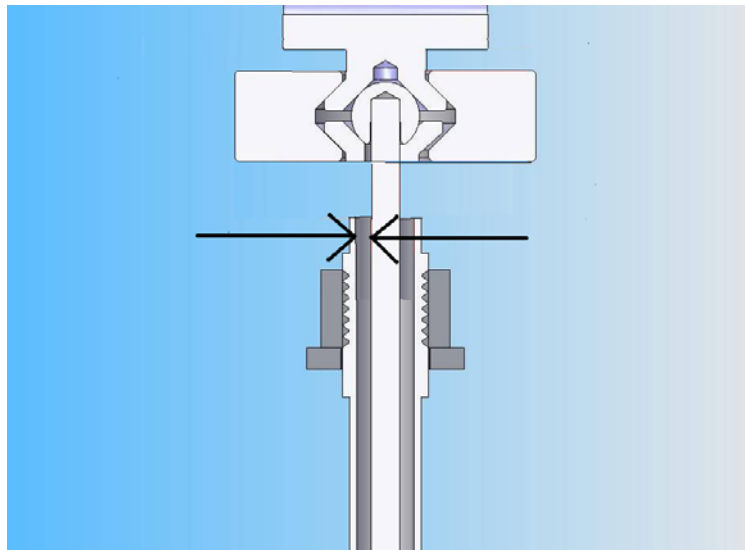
check for minimum clearance between arrows all the way around Noodle Flexures with 0.8 mm or larger diameter wire
